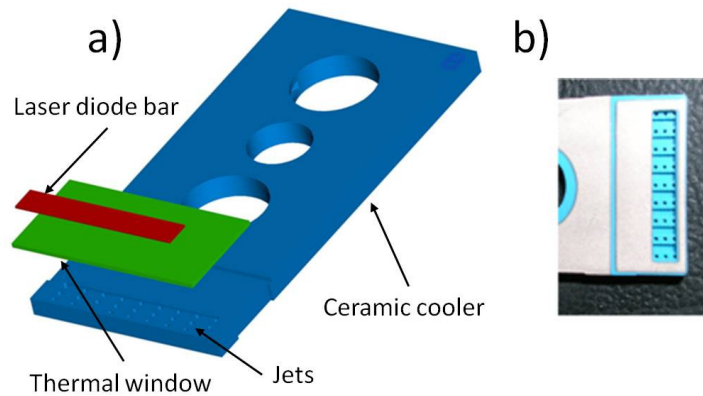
a) Exploded view of a ceramic cooler, thermal window, and laser diode bar [22] b) A prototype assembly with metallized LTCC illustrating a window in the LTCC surface and array of jets [69]
